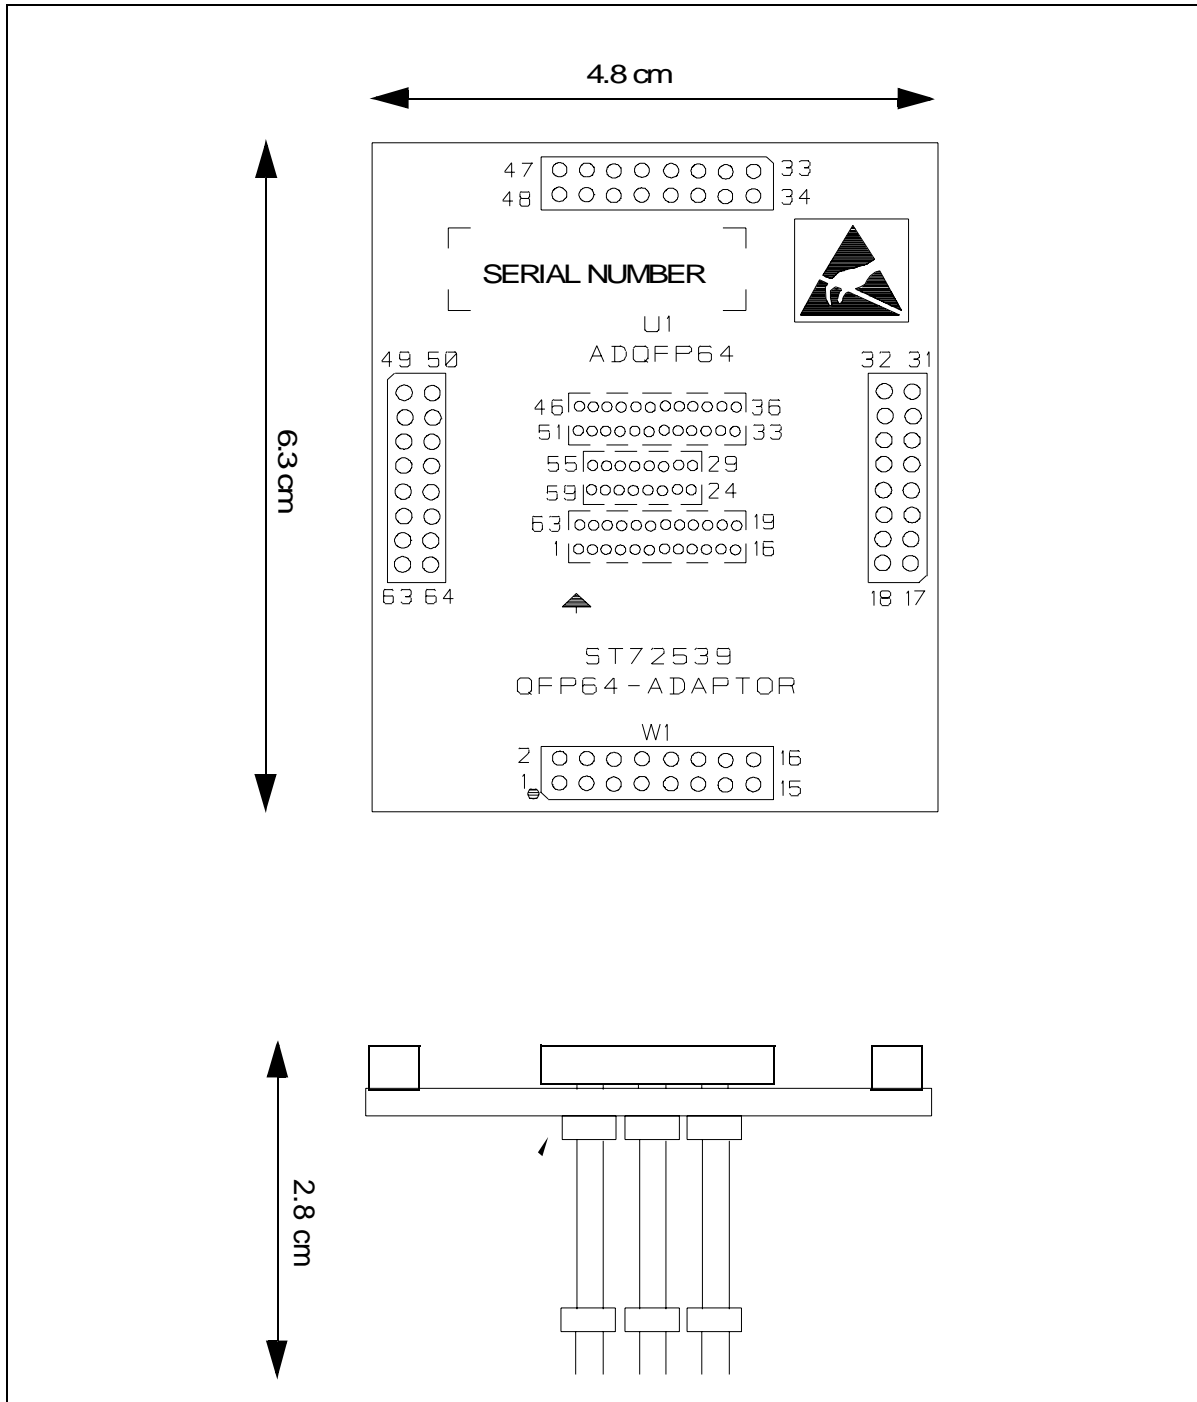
QFP64 Pin Socket Adapter (ref.: DB389) Components Layout
